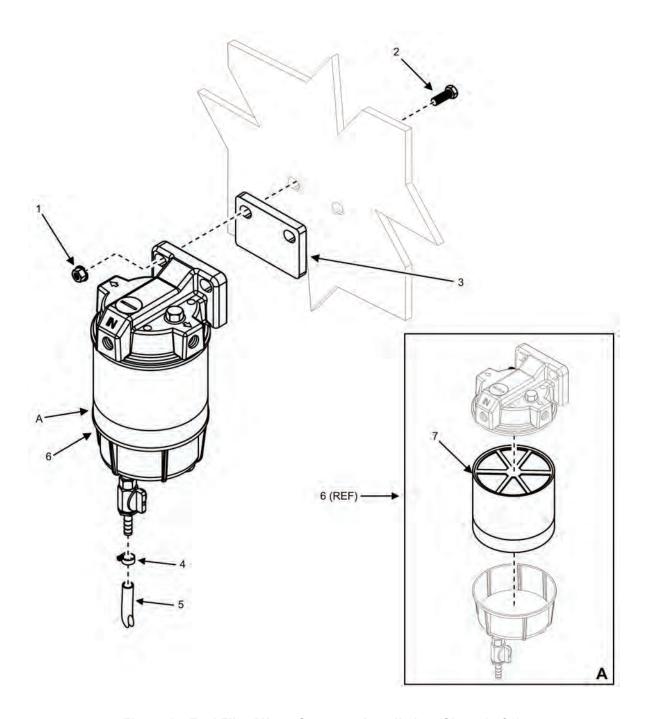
Fuel Filter/Water Separator Installation (Sheet 1 of 3).
